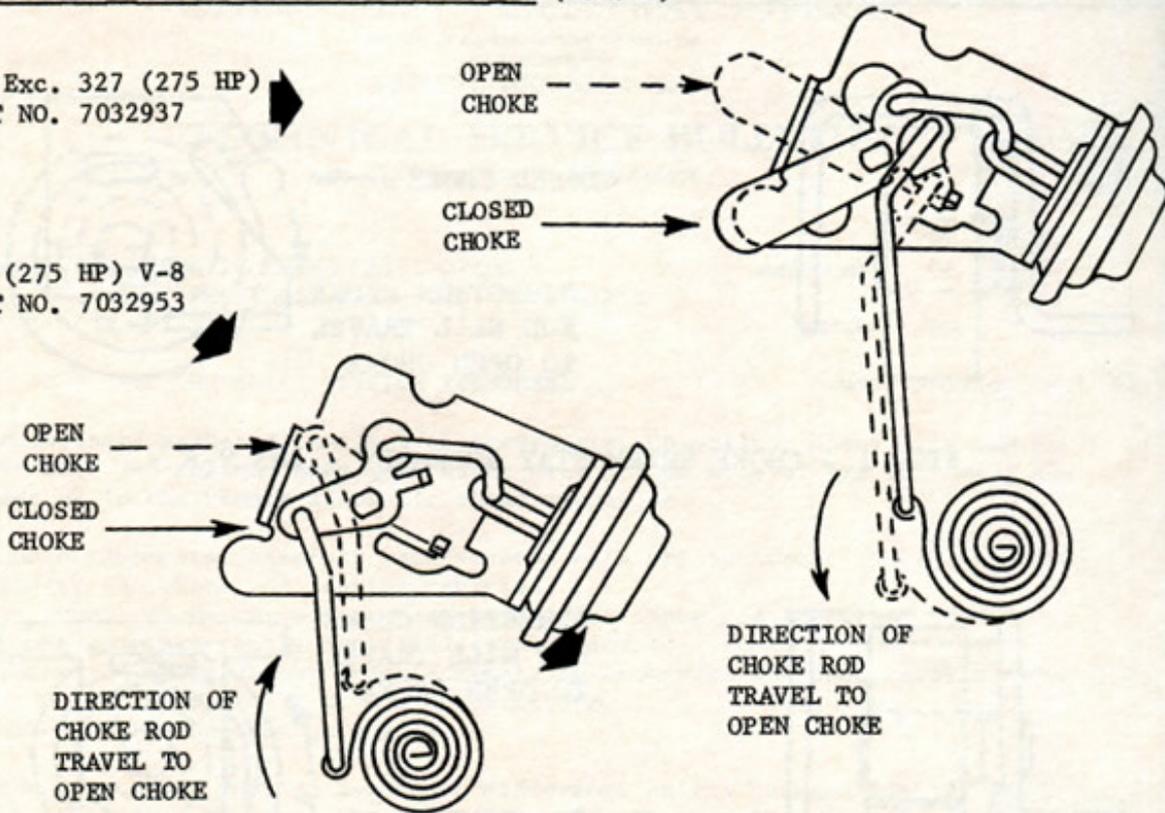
FIG. IV - ROCHESTER 4MV (QUADRA JET) VACUUM BREAK ASSEMBLY
